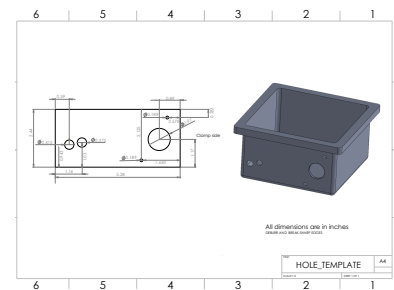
Hole template engineering drawing (Scale 1:2) specifying the acoustic port, clamp-side holes, and cable entry — standardized across all 55 units.
